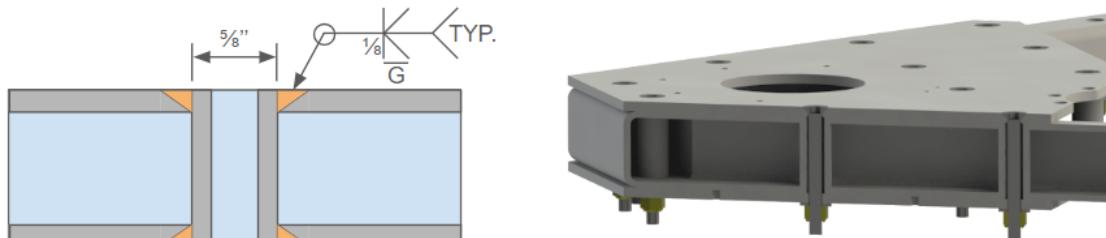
Typical Crush Tube Weld Detail (Left) and Chassis Cross Section (Right).
